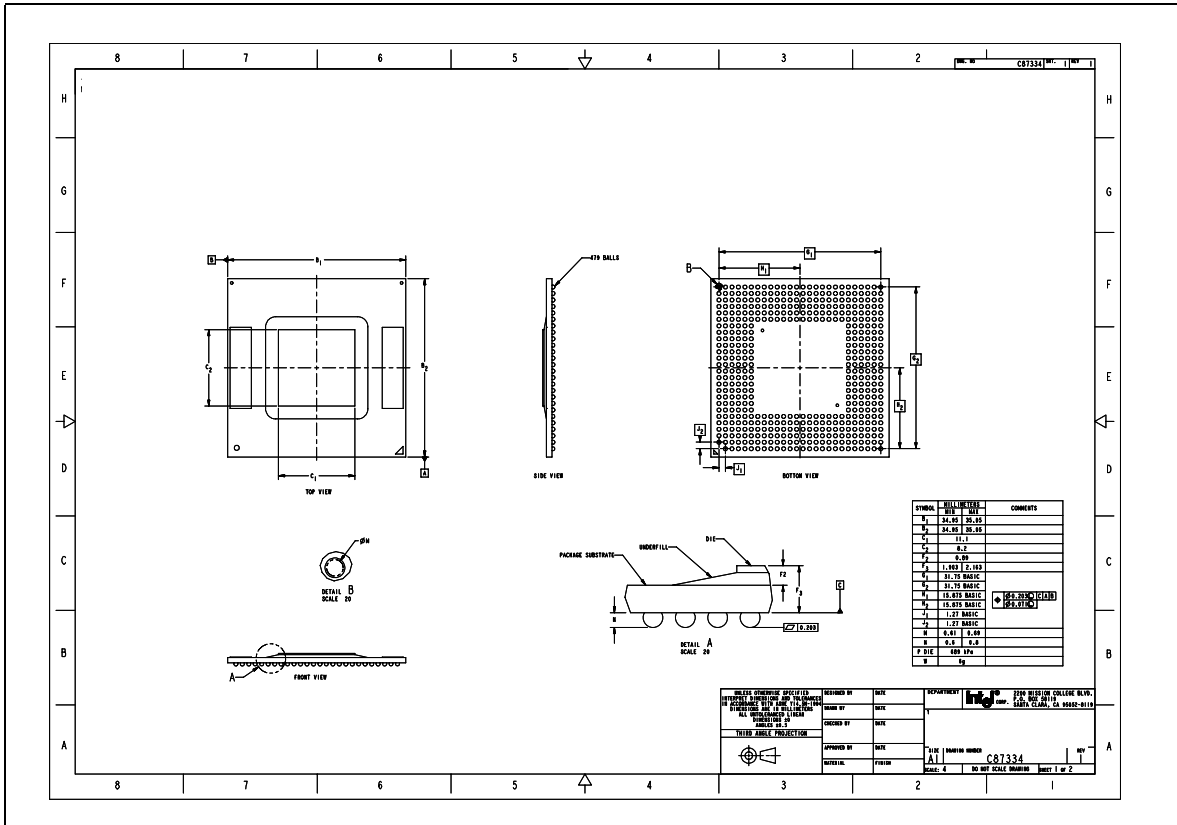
Micro-FCBGA Processor Package Drawing (Sheet 1 of 2)
